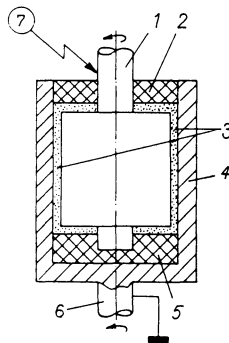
A clutch scheme containing ER liquid: 1 - rotor; 2, 5 - insulators; 3 - ER liquid; 4 - coupling; 6 - driving shaft
